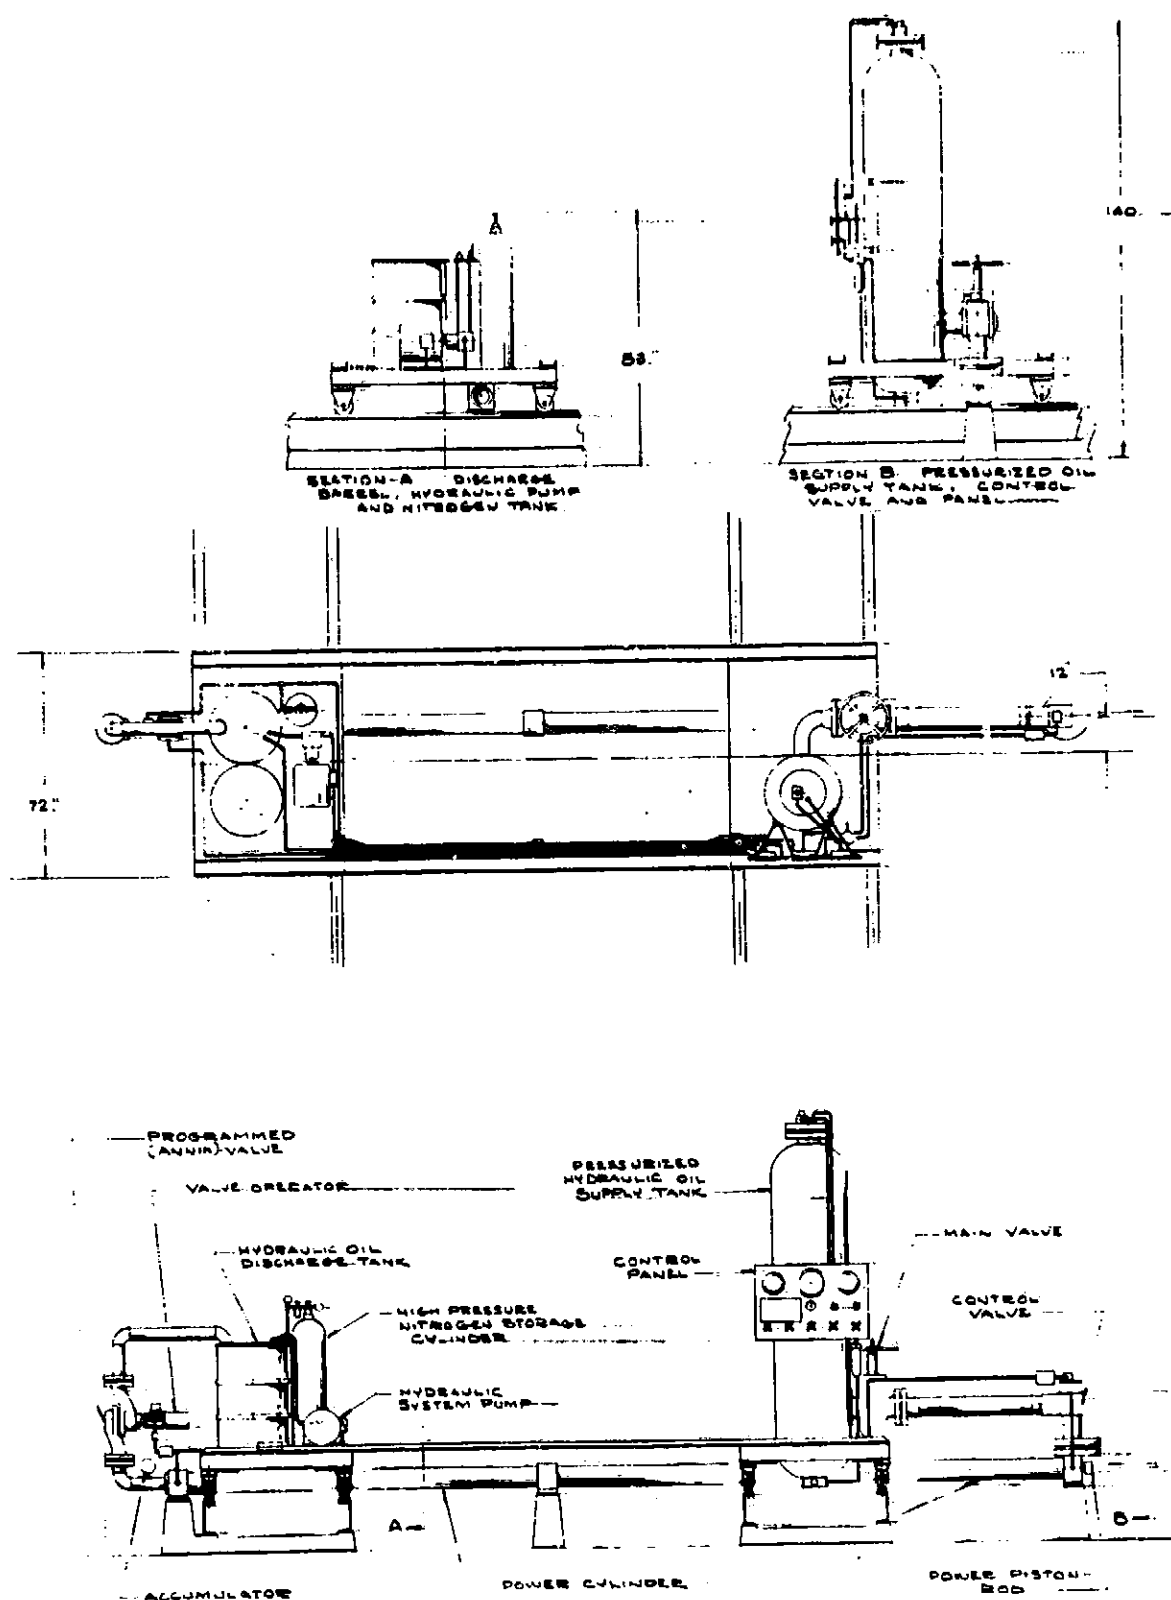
General Arrangement Hydraulic Power/Control Unit
